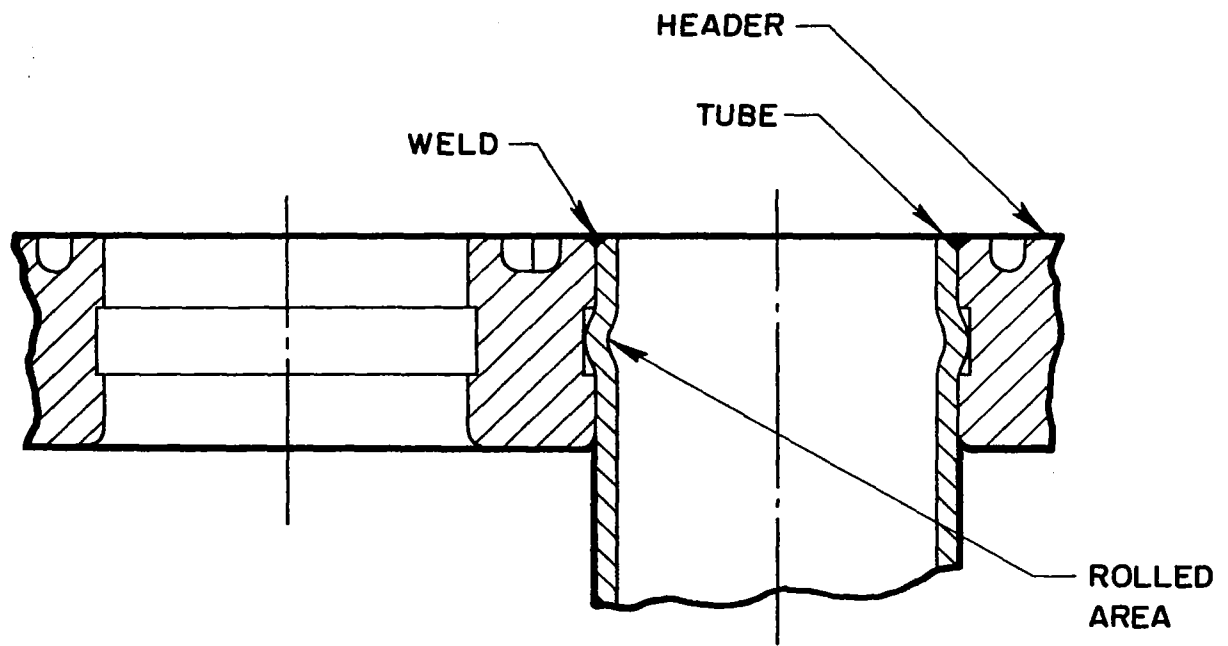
Condenser Tube-to-Header Rolled and Welded Joint
